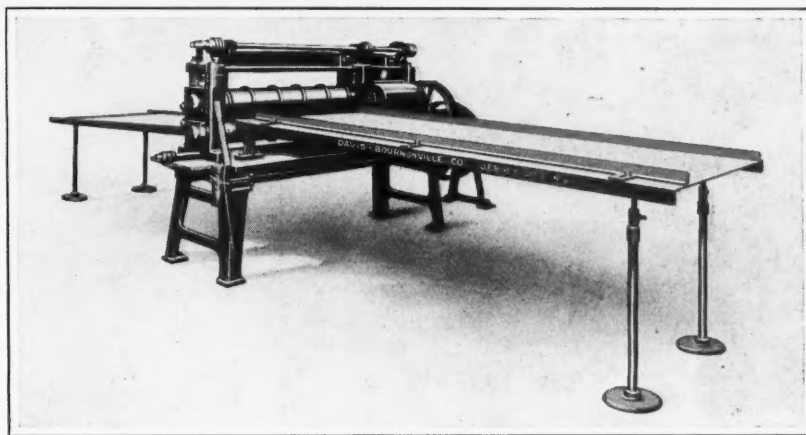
Machine for slitting Commercial Steel Sheets, which is built by the Davis-Bournonville Co.
